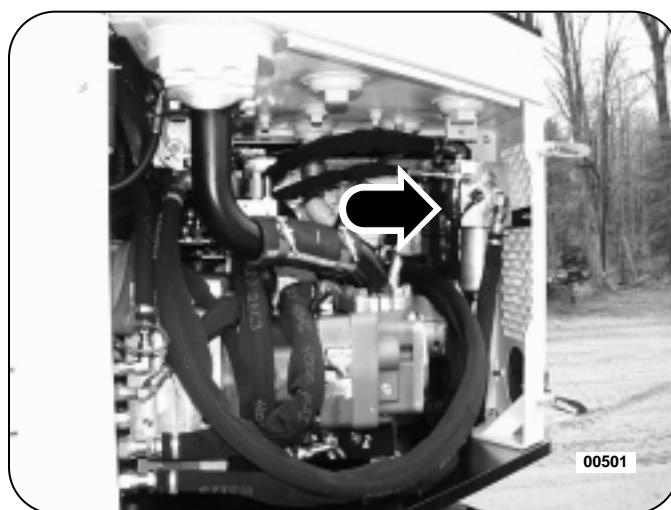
Wheel Drive Charge Pressure Manifold Assembly
